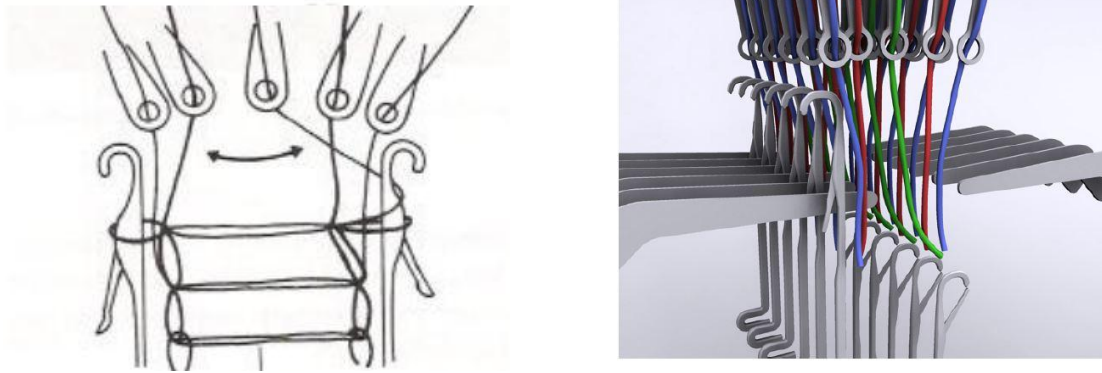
A cross-sectional view of the needle bars and guide bars on a double needle bed Raschel knitting machine<sup>25,26</sup>.
